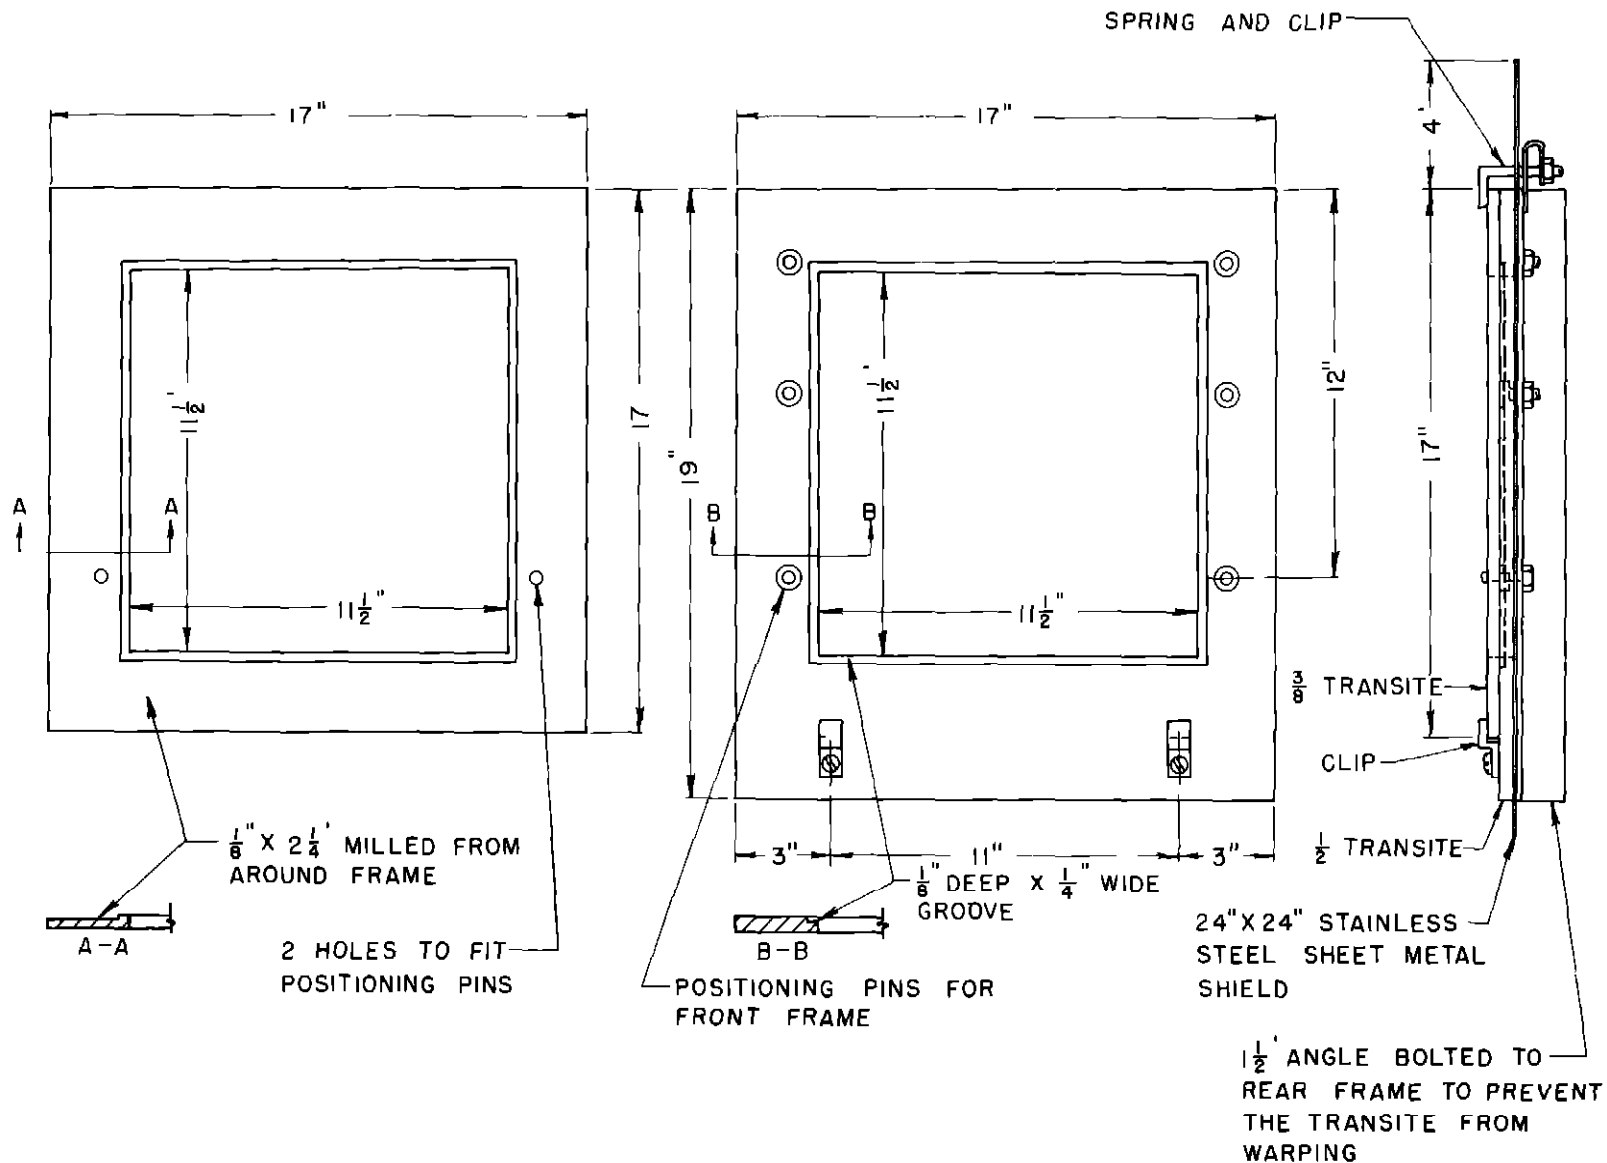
DETAILS OF TRANSITE FRAME TEST PANEL SUPPORT
